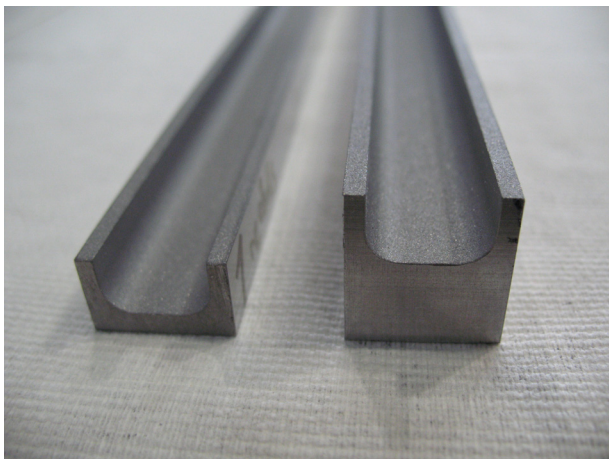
Two parts of the heated straight channel section after fabrication of surface roughness: left- plasma facing part, right- BU facing part.
